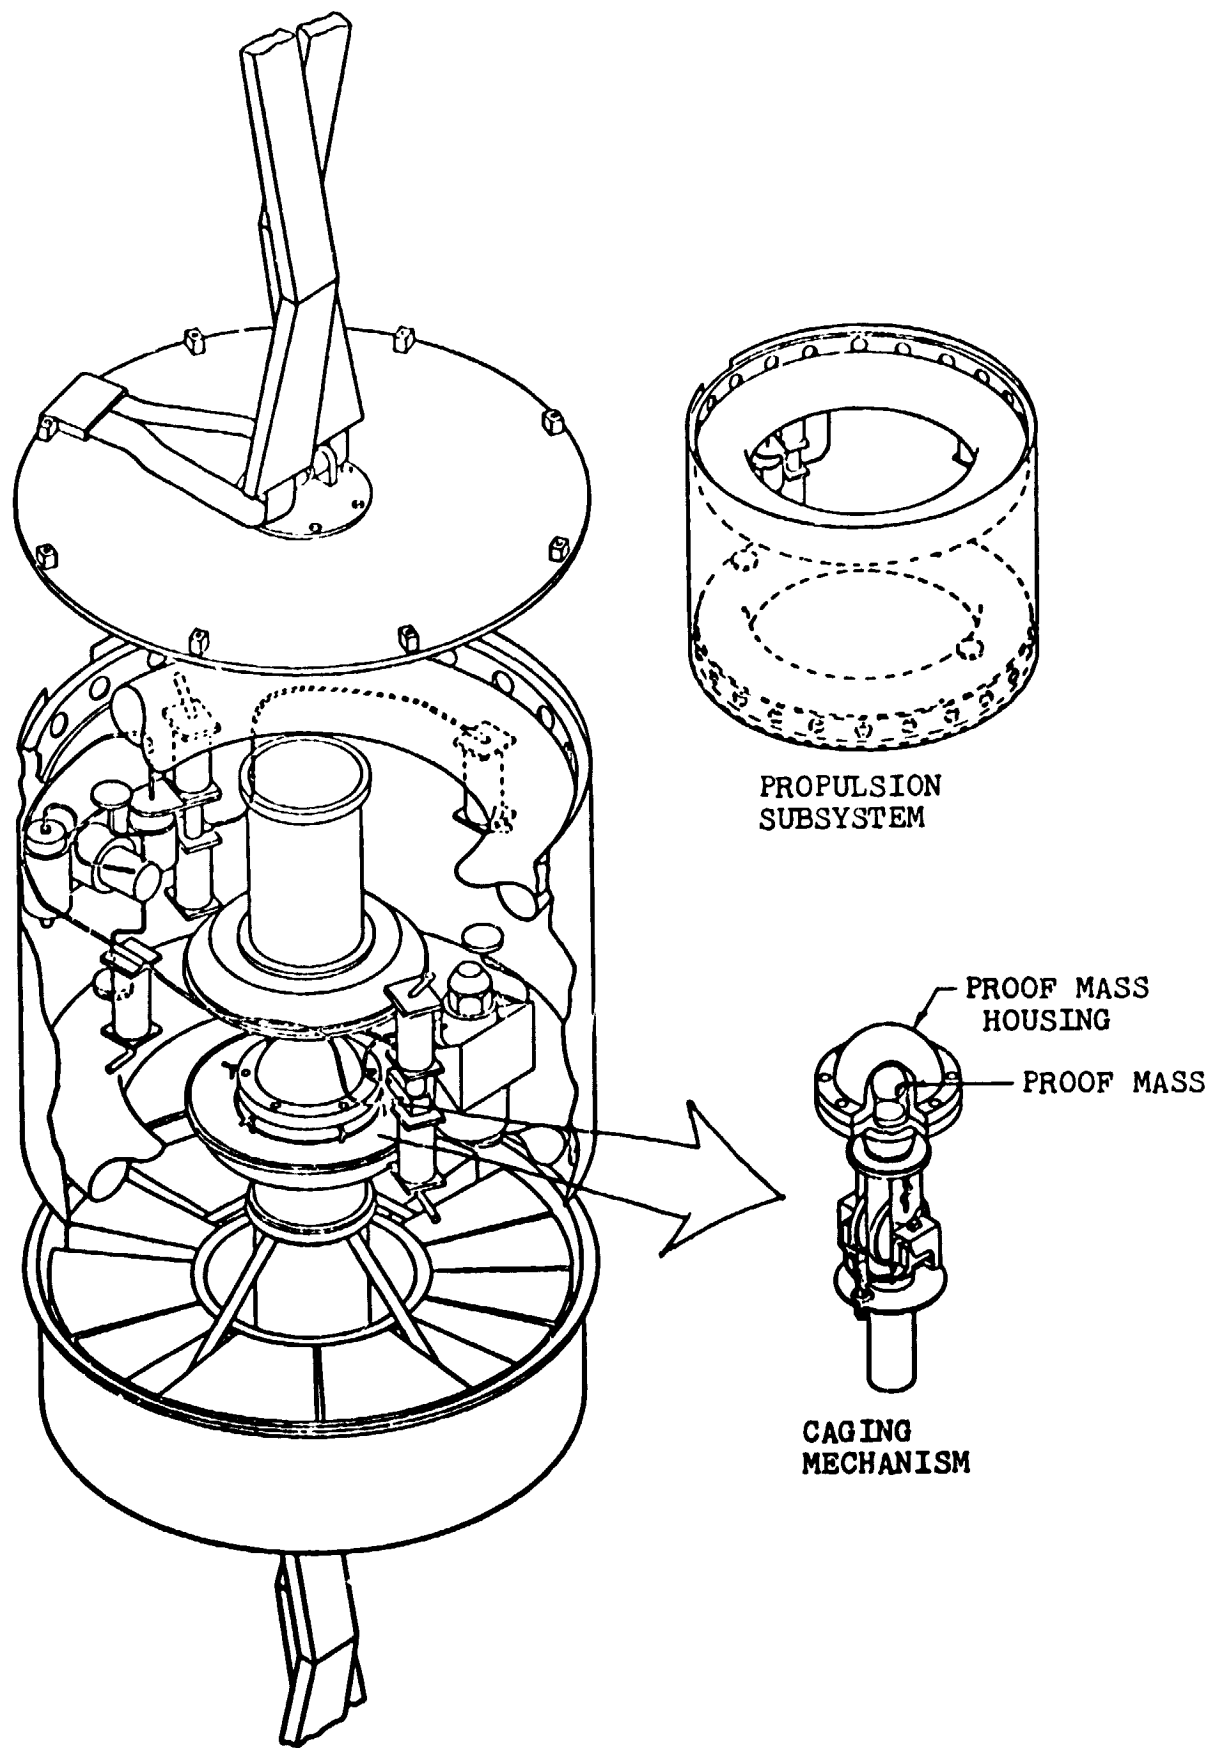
DISCOS SHOWING LOCATION OF CAGING MECHANISM.
